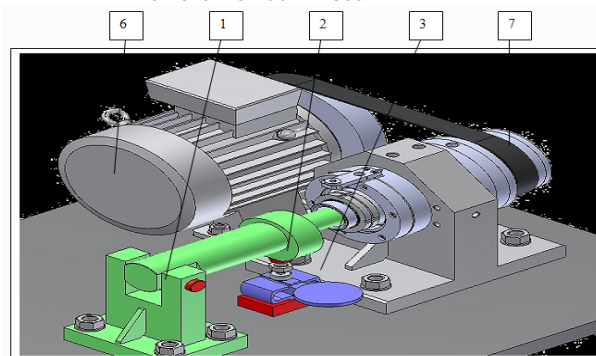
D model of experimental stand, 1- holder, 2- to retighten screw, 3- dynamometer, 6- drive, 7- Poly V belt
